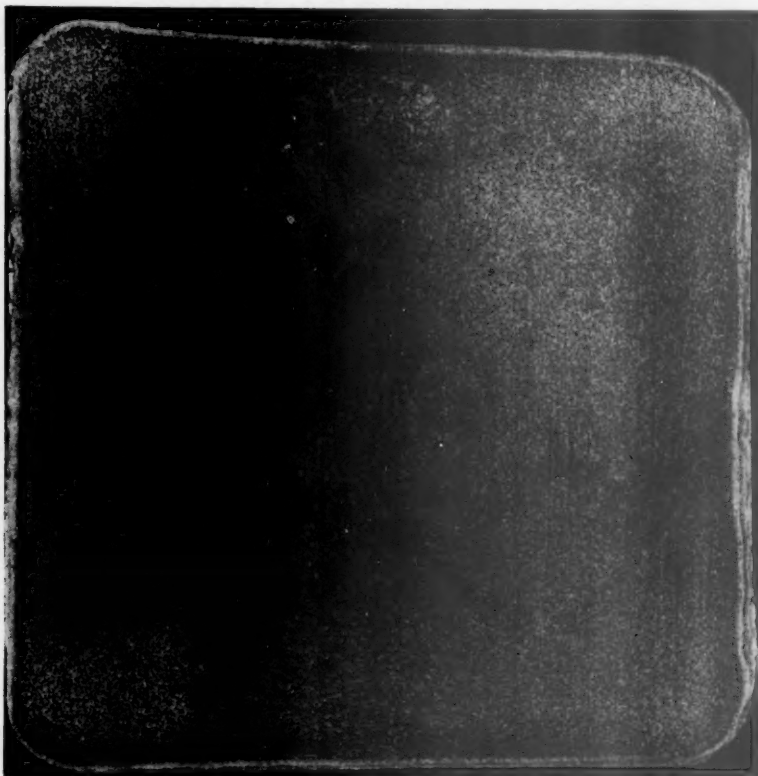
MACROGRAPH OF BOTTOM END OF 6 BY 6-INCH BILLET ROLLED FROM A 23 BY 25-INCH BIG-END-UP HOT-TOPPED INGOT OF C-1045 KILLED STEEL. LIGHT EDGE IS EVIDENCE OF A SHELL. The surface condition at this point, which usually is covered with fine seams, may be related to the presence of a shell.
